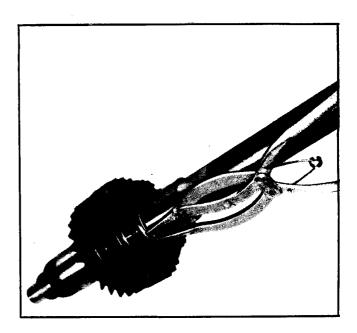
C-16 Removing 1st and 2nd Synchronizer Snap Ring
